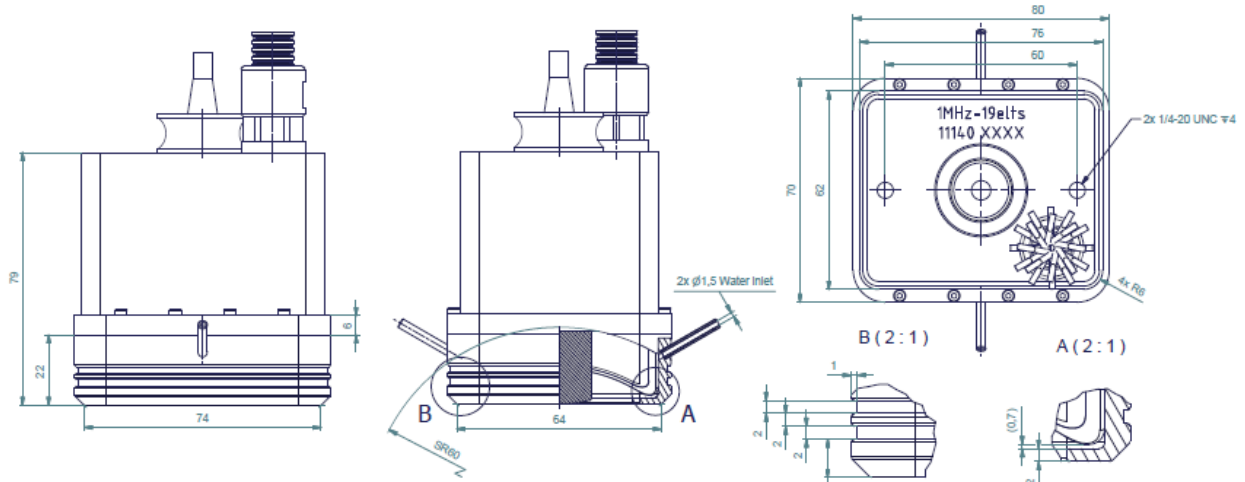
Detailed drawing of the 1 MHz, 19 element array transducer design. The main housing measures 6.2 x 7.6 cm (not counting the 2-4 mm mounting shoulder for the coupling box).
